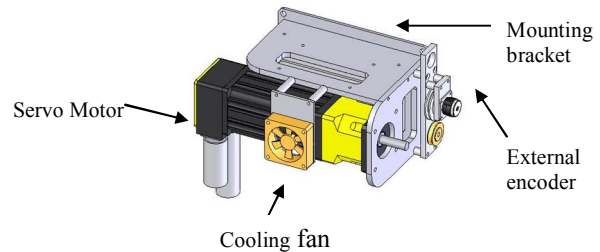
Each motor and controller is mounted in their own subassemblies. This modular design makes swapping them out quick and easy. (Not shown: controller card, spool.)
